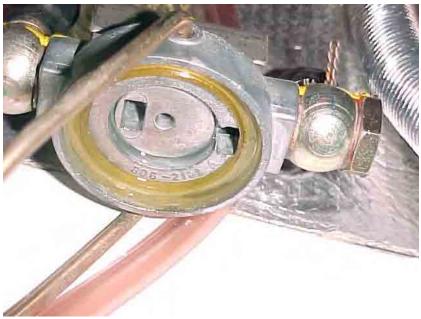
Fuel Filter Gasket seal, Body and Clamp
